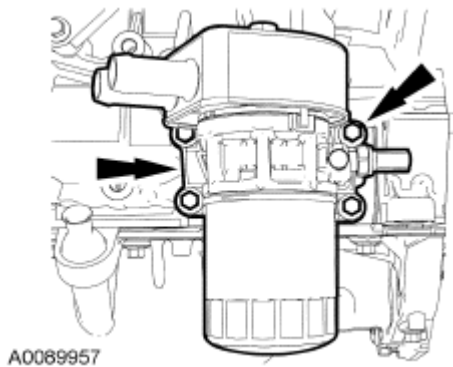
Locating Oil Filter, Bolts & Oil Filter Adapter
